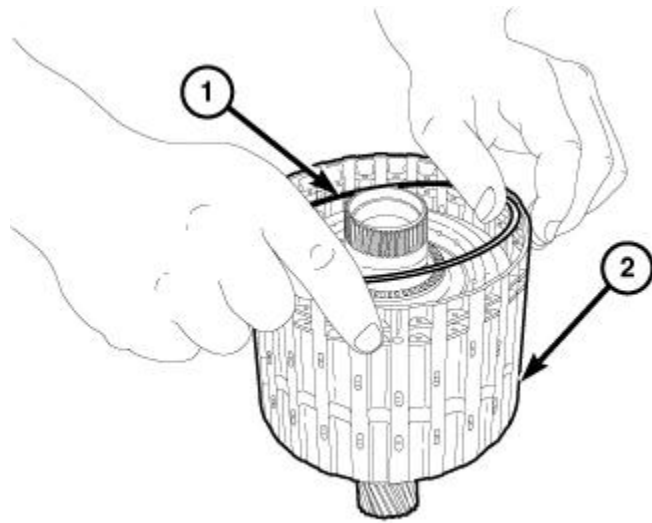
E-Clutch & P4 Sun Gear/C/E Clutch Retainer
